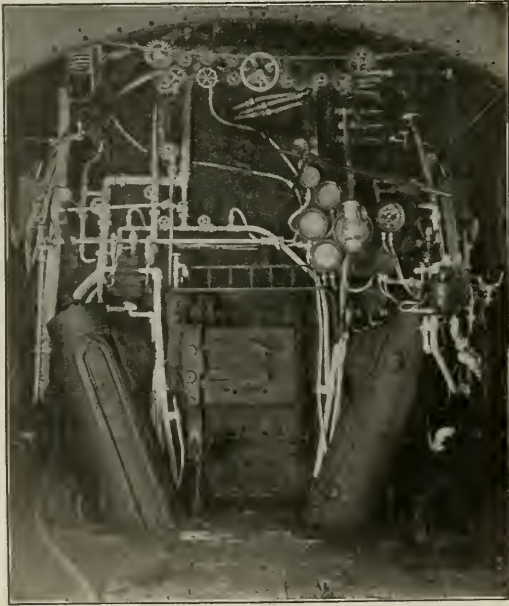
LOCATION OF BOILER BACK-HEAD FIXTURES IN LARGE LOCOMOTIVE
